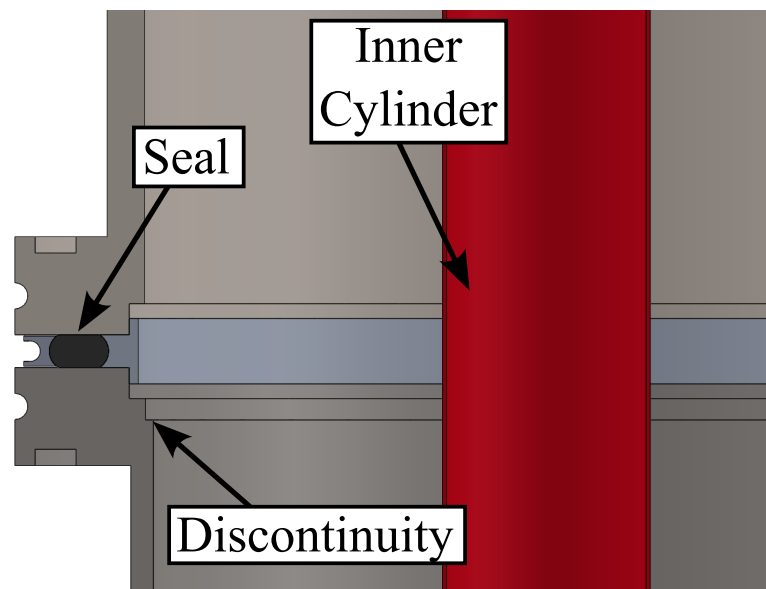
Sealing scheme for ISO flanges illustrating discontinuity of inner diameter and centering ring for holding O-ring in place of a groove.
